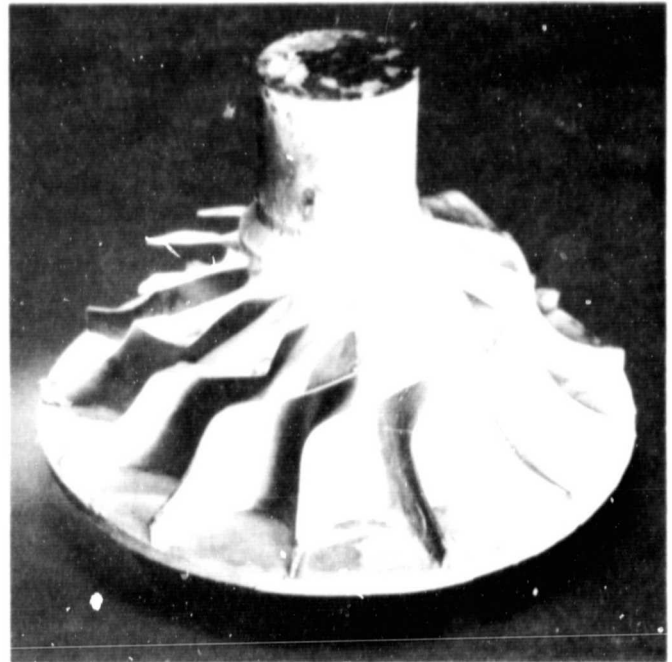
First Sintered ACC AGT101 SN-522 Bladed Rotor.
